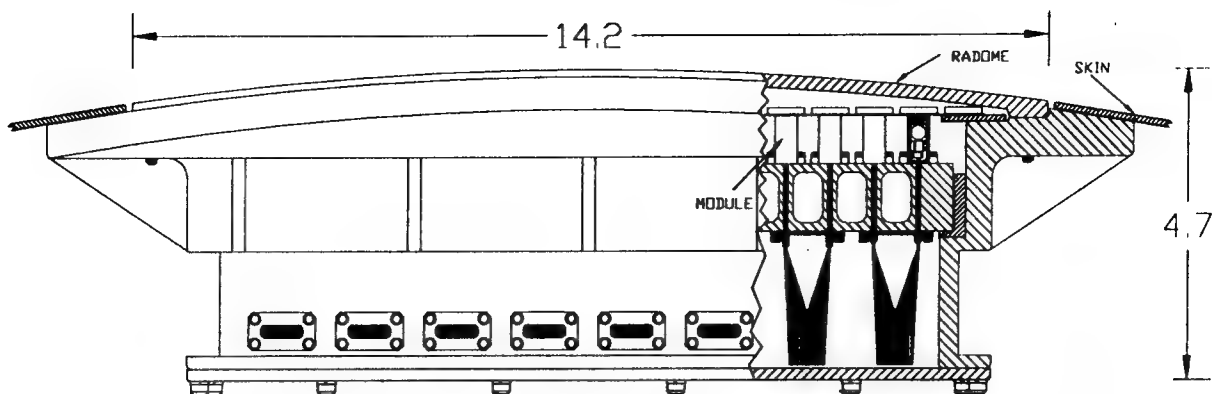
Remote Airborne Transmit Array Cross-Section View
